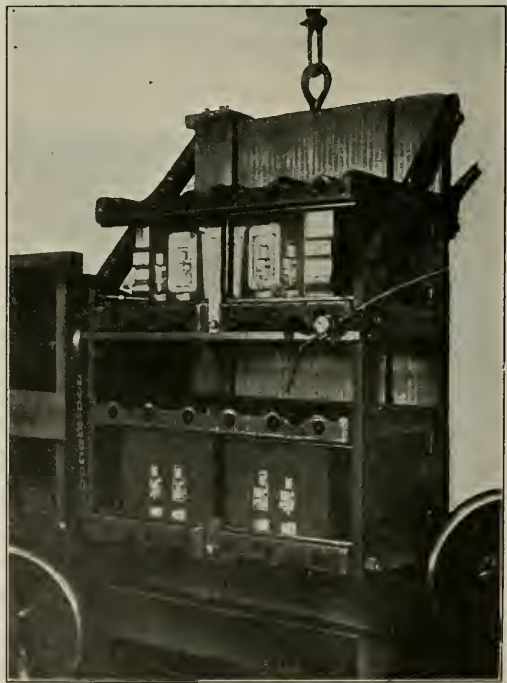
FIXTURE FOR HOLDING TWO DIES AND TWO MODELS IN ONE SETTING
